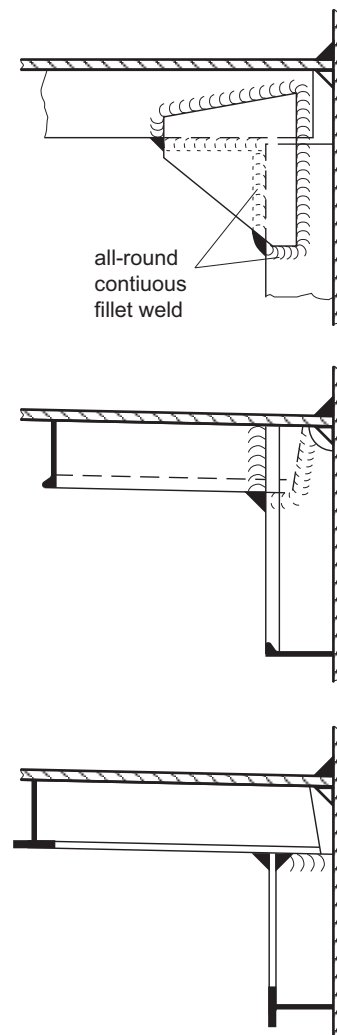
Frame-(to-bracket)-to-deck beam welded joint
